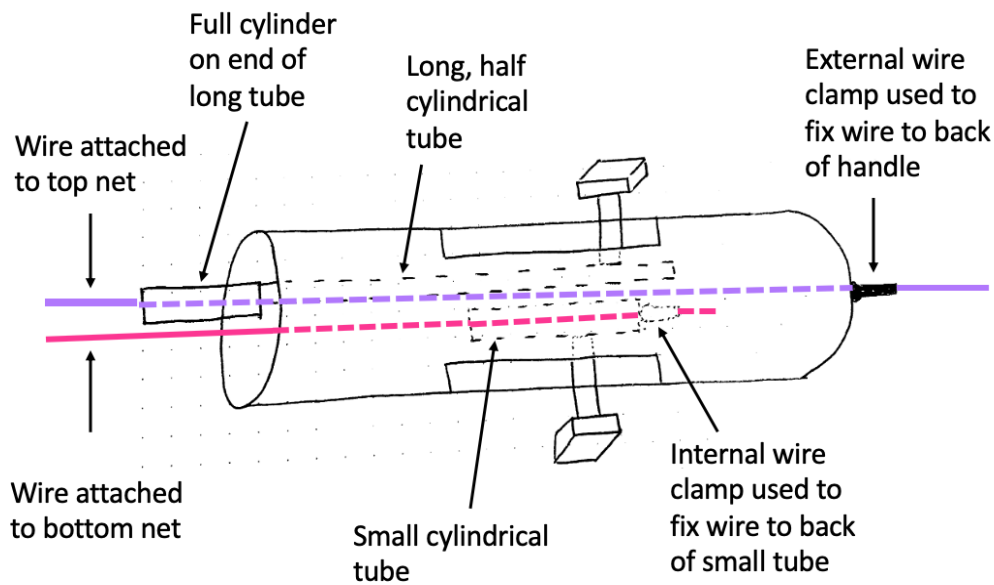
Sketch of the locations of both wires in the handle. The wire connected to the top net, shown in purple, is inside of the end of the long, half cylindrical tube and is fixed externally on the back of the handle. The wire connected to the bottom net, shown in pink, is inside of the small cylindrical tube and is fixed to the back of this small tube, which is located inside the handle. Wire clamps are used to securely hold the wires in place.
